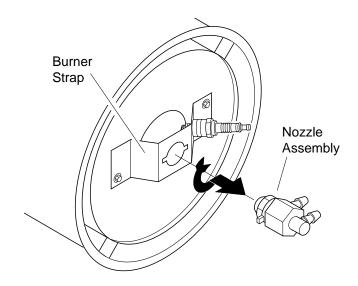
Removing Nozzle Assembly, 30,000 BTU/Hr Model
